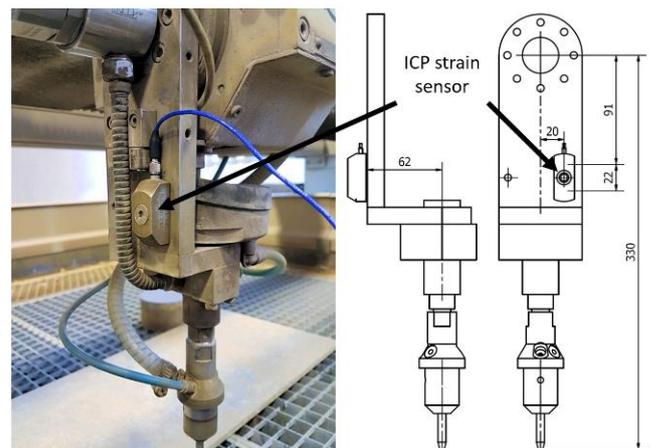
The way of mounting the deformation of cutter head sensor in the supporting structure of the AWJ machine
